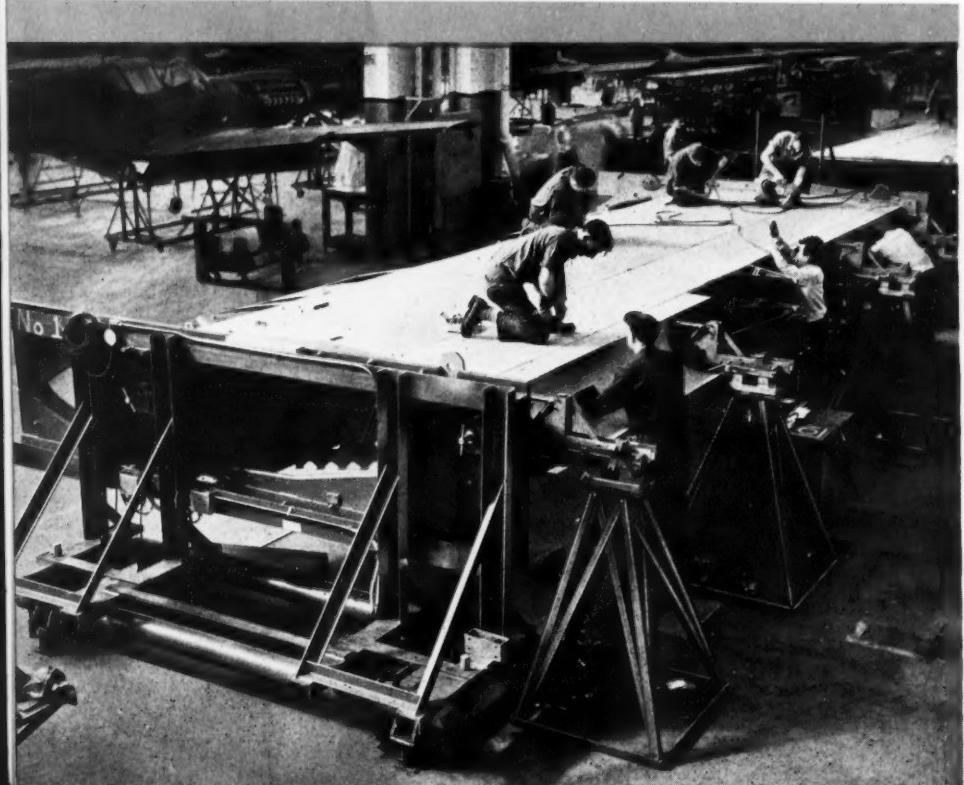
Rigid Horizontal Fixture in which Initial Assembly of the Center Wing Panel is Carried on. Locators on Standards at the Right Hold Wing Flap Hinge Holes in Line
